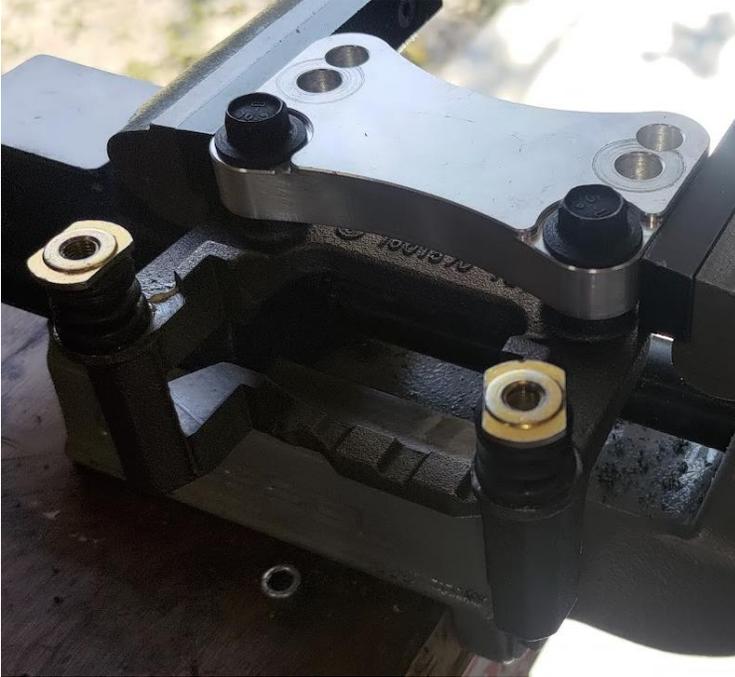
SRA adapter torqued onto Cobra caliper bracket
